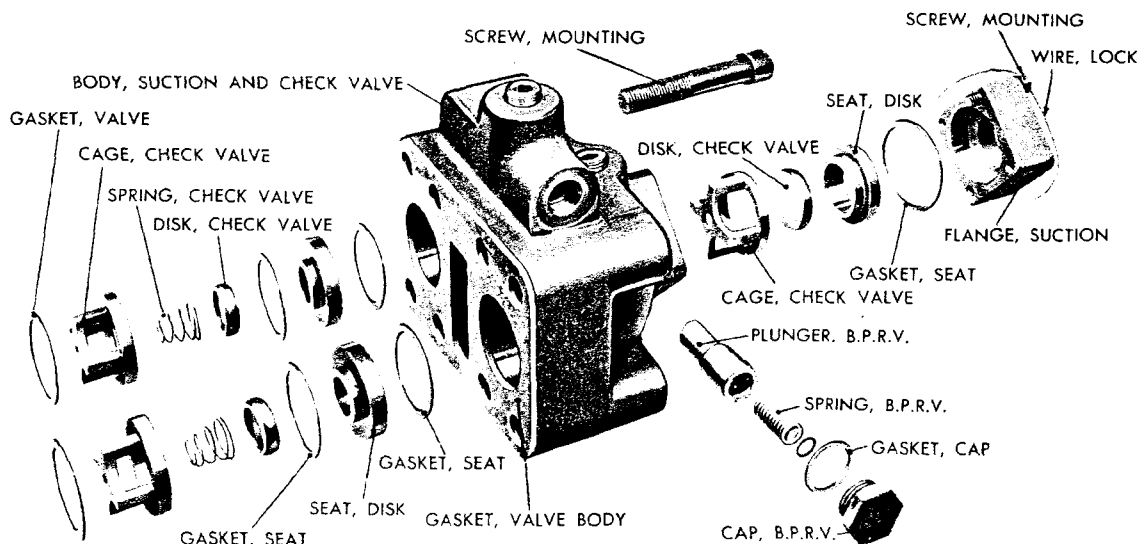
Pump Suction and Check Valve, Assembly, Exploded View
